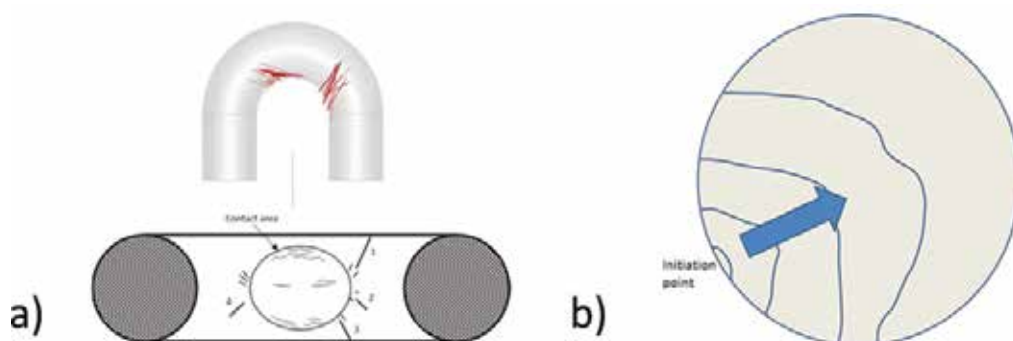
(a) Fretting of contact surfaces between chain links. (b) Fracture surfaces as crack propagates through chain.
